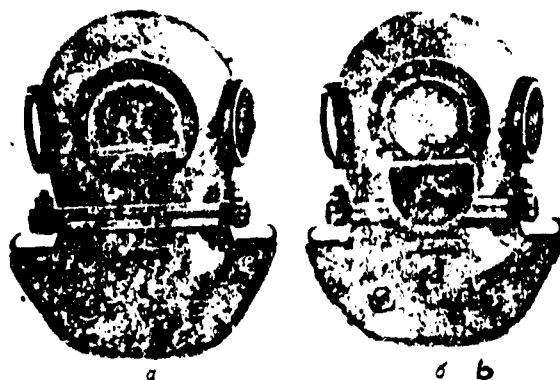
Device with Protective Glass in Front Light of Diving Helmet: a - position of protective glass during welding; b - position of protective glass during work breaks.
